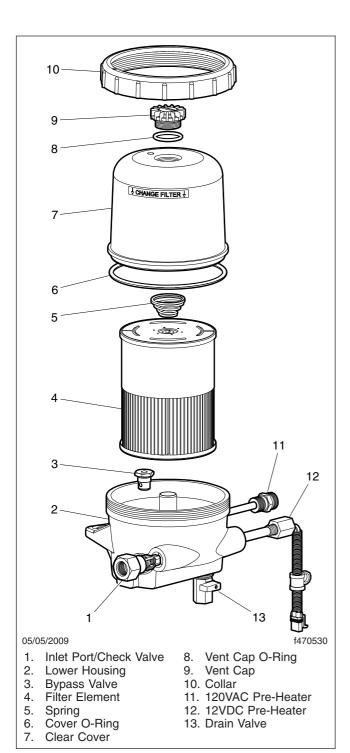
, DAVCO Fuel/Water Separator (Fuel Pro 482 shown)
